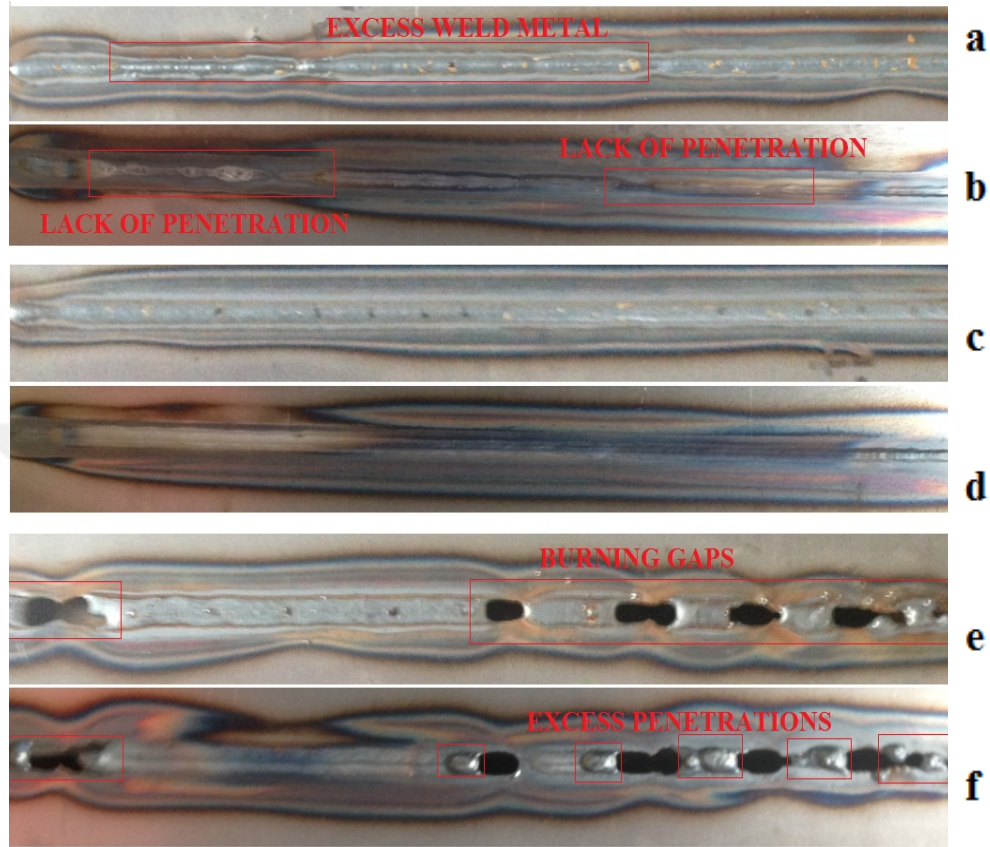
Samples obtained under the different welding conditions (a)Welding cap of 9th Run, (b) Welding root of 9th Run, (c)Welding cap of 25th Run, (d) Welding root of 25th Run, (e)Welding cap of 35th Run, (f) Welding root of 35th Run
